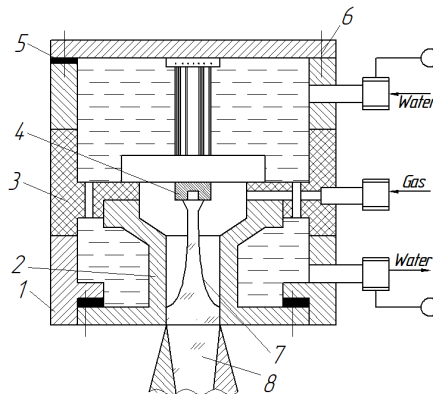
Plasma sprayer diagram: 1 – spray body; 2 – nozzle; 3 – electrical insulating insert; 4 – electrode; 5 – gaskets; 6 – mounting screws; 7 – arc; 8 – plasma jet [4].
